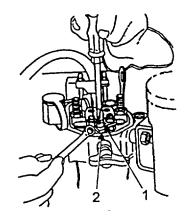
DECOMPRESSION ADJUSTMENT
